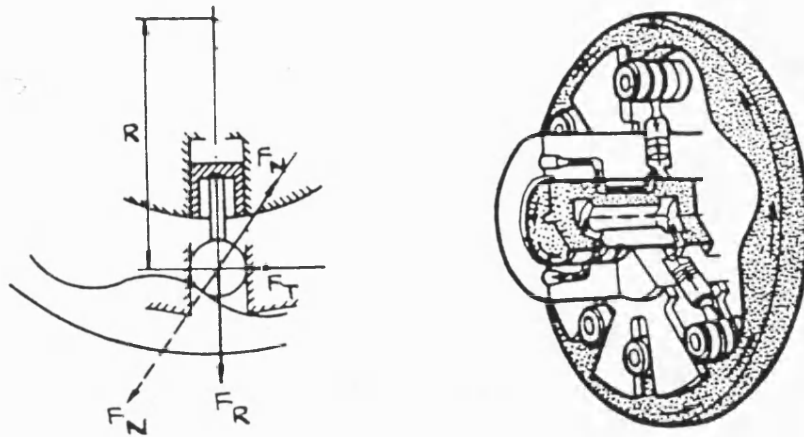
HAGGLUND RADIAL PISTON CAM MOTOR
